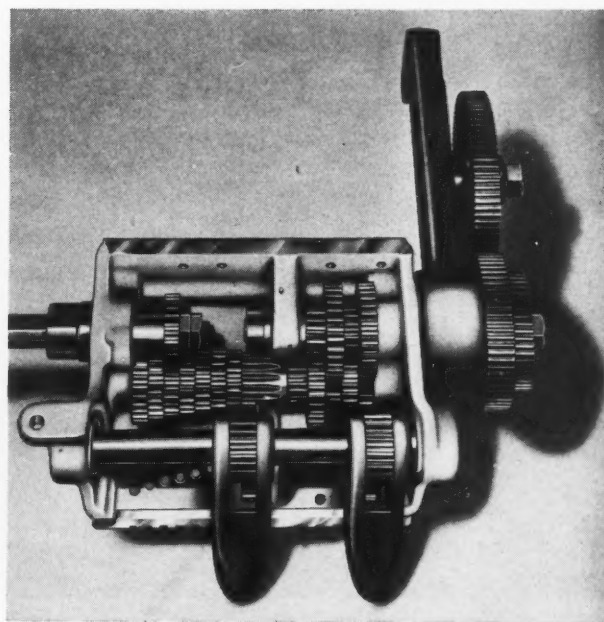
Interior view of quick-change gear-box developed for South Bend lathes
